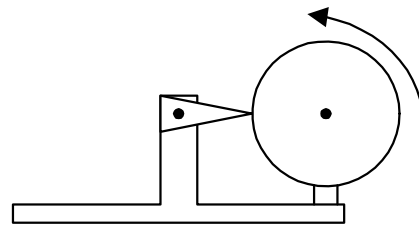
Turning operation with a fixed tool and rotating workpiece.
